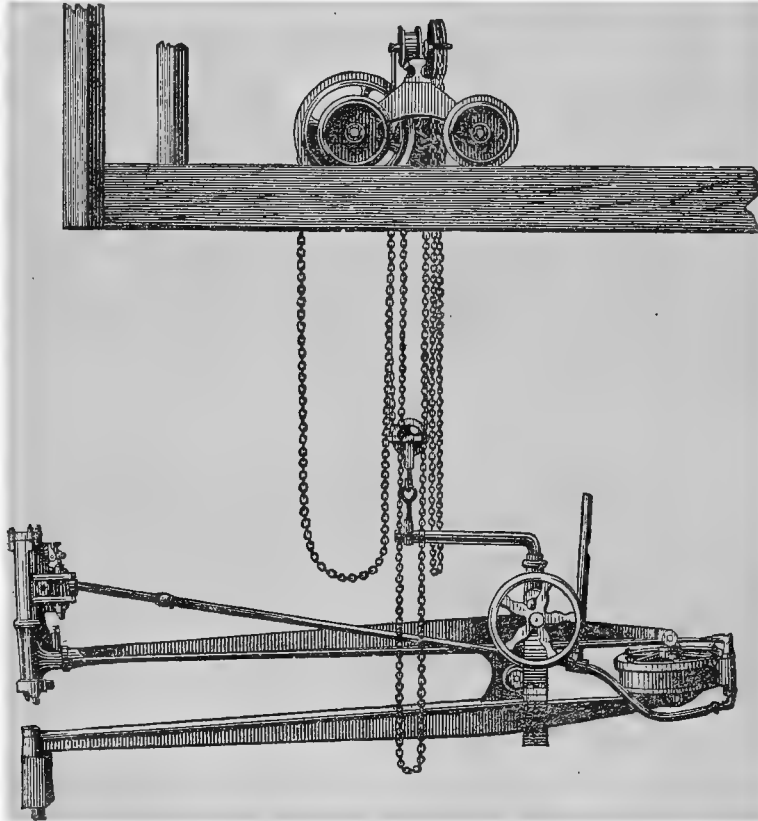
PORTABLE PNEUMATIC RIVETER.
